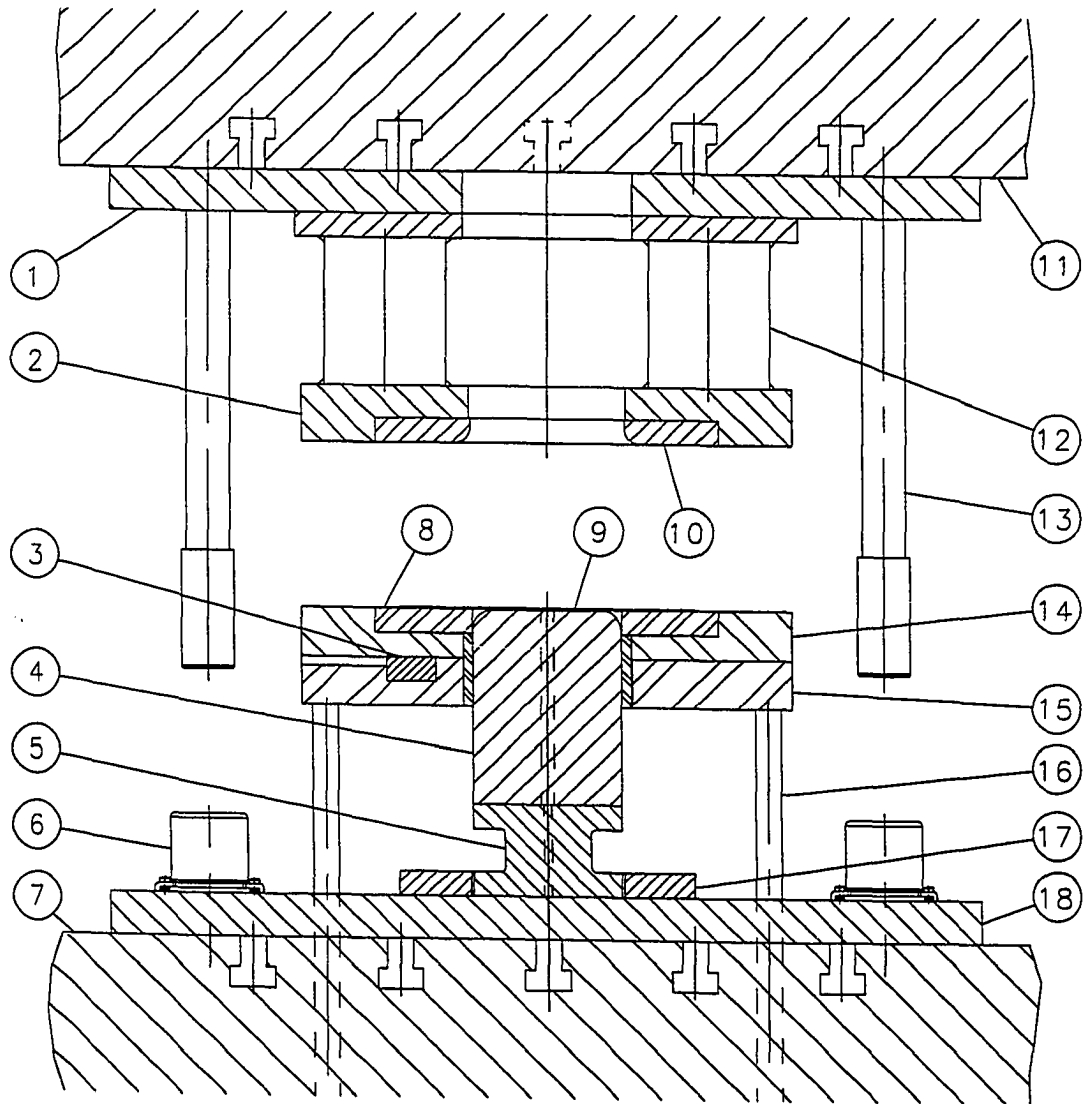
Assembly drawing of the die set for deep drawing of a round cup in Minster press.
